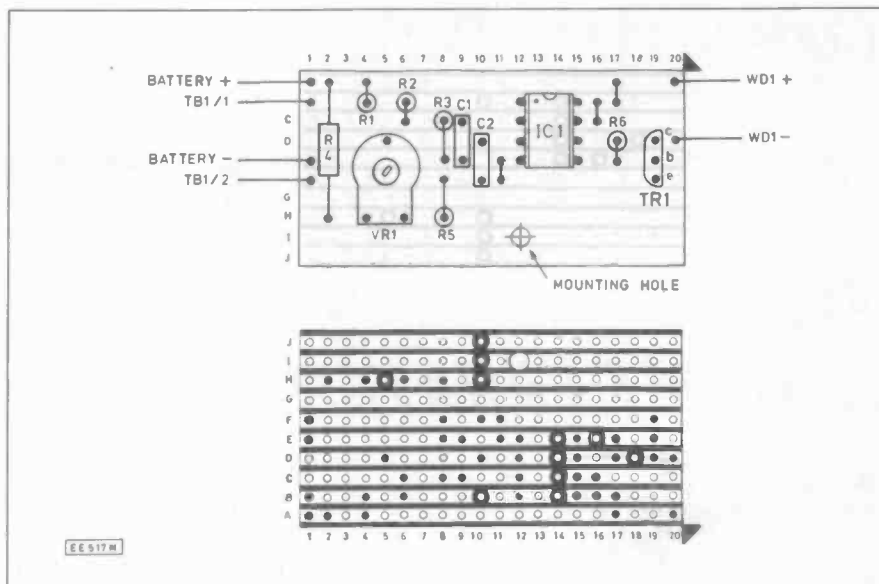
Stripboard component layout and details of breaks required in the underside copper tracks.
